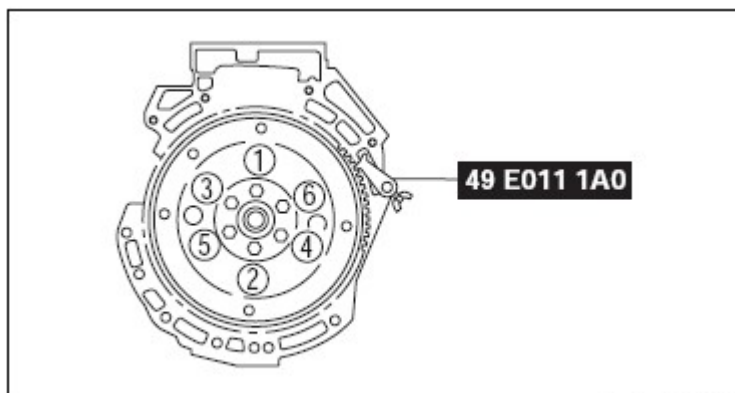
Identifying Rear Oil Seal Bolt Tightening Order
